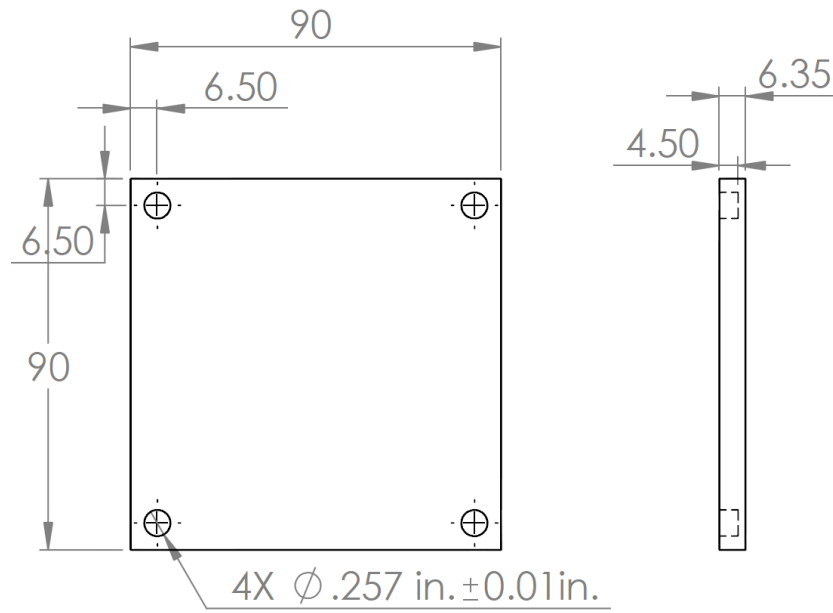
The second bead die for our prototype design. All dimensions are in mm with a tolerance of 0.1 mm unless other specified.
